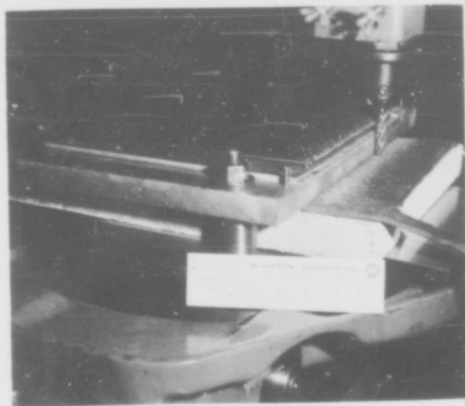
Machining Edge of TZM Molybdenum Structural Panel
